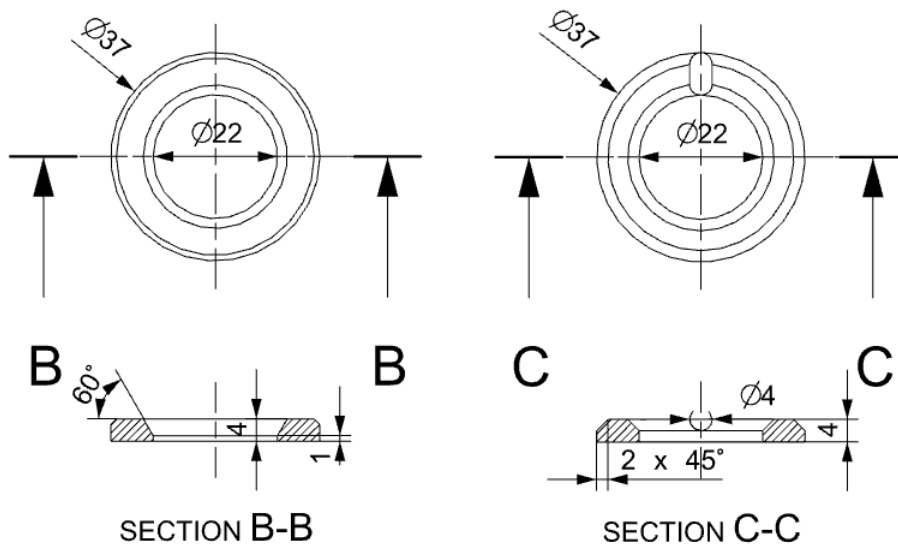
Special washers used in injected assemblies, dimensions in mm for use in combination with M20 bolts. Left: washer under bolt head. Right: washer under nut (groove facing towards the nut)
